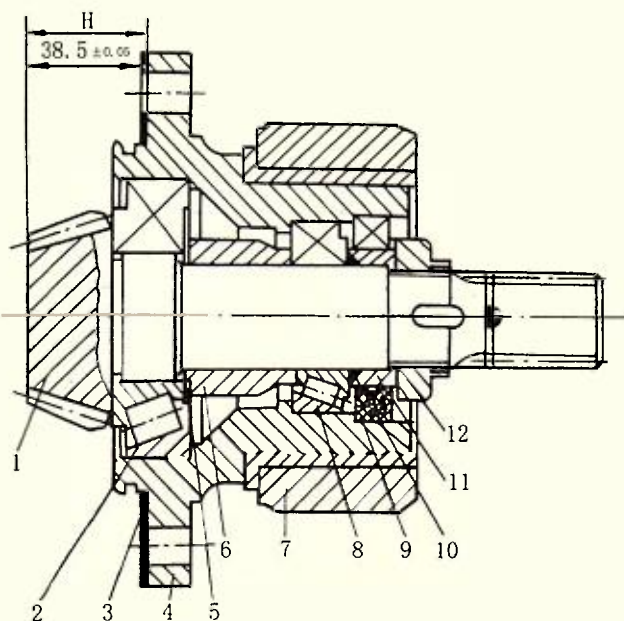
4 The preloading of bearings of the front axle drive bevel gear
